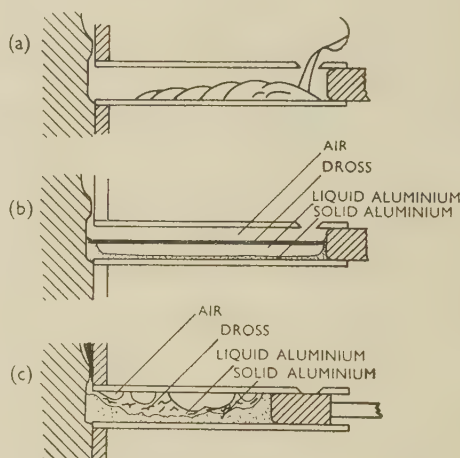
Cold-Chamber Pressure Die-Casting Machine of the Horizontal-Sleeve Type. Stages (a)–(c) show that considerable chilling of the metal takes place before injection.
